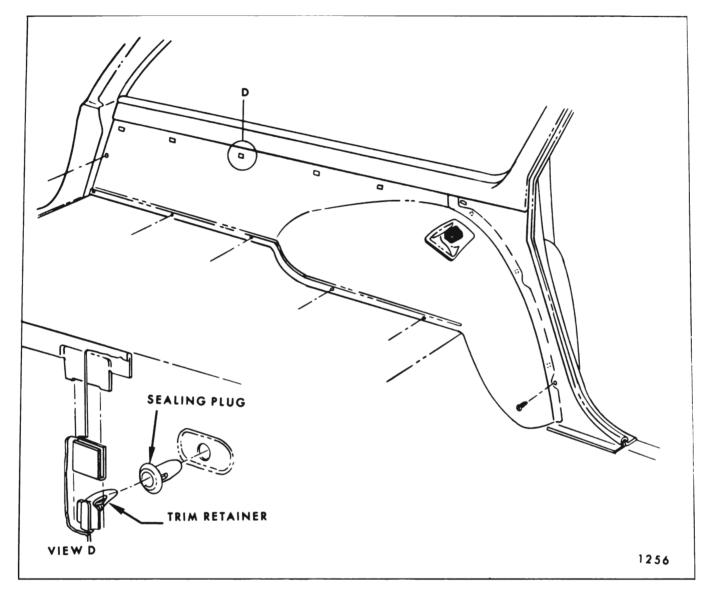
Rear Quarter Trim Panel, Left Side - Pontiac 23335 Style
